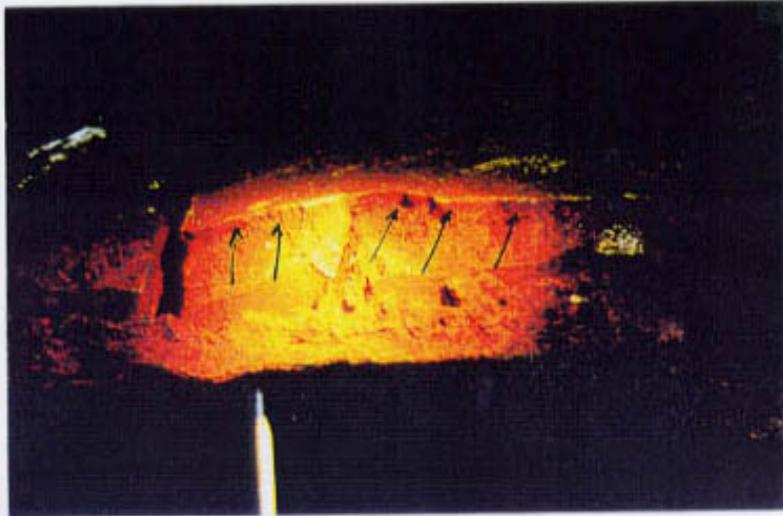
Fractures F0 starting from partial penetration weld roots
